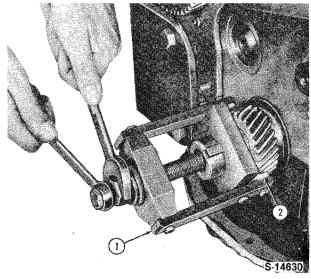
Installing Crankshaft Gear 1. Installer No. 2134 2. Insert No. 1237
